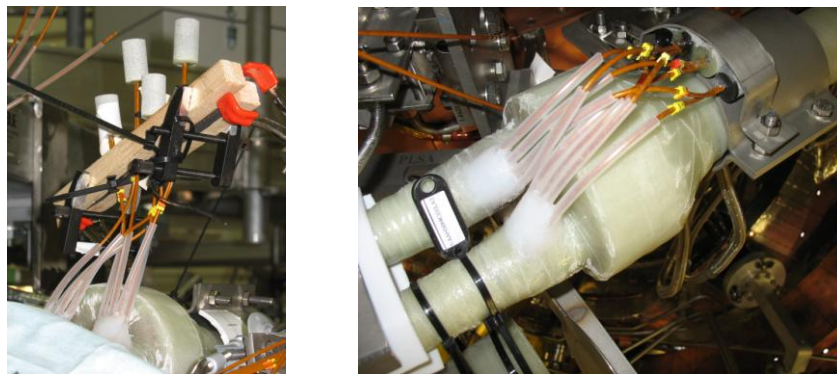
Casting of four QD boxes on one joint (left); ready QD boxes mounted on the joint clamp (right)
